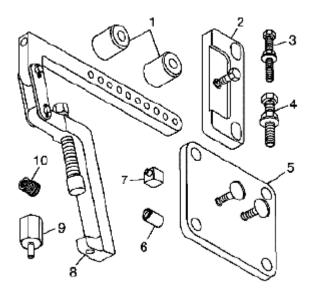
Identifying J 43690 Rod Bearing Clearance Checking Tool Courtesy of SUZUKI OF AMERICA CORP.
